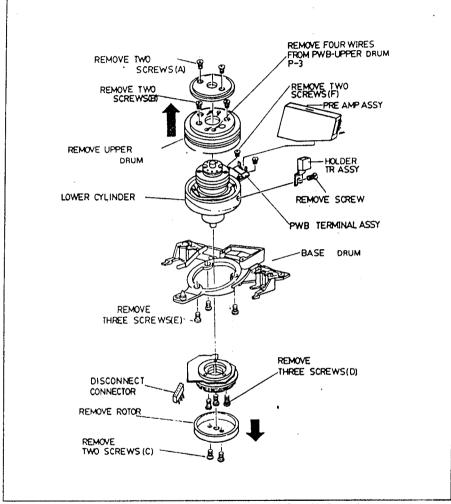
Video Head Removal and Drum Motor Assembly Removal.
